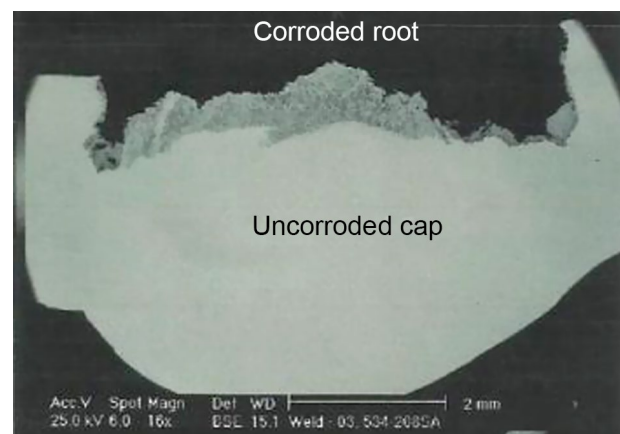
Cross sectional microphotograph of the corroded weld route in case of one side (MMA) weld of the elbow
